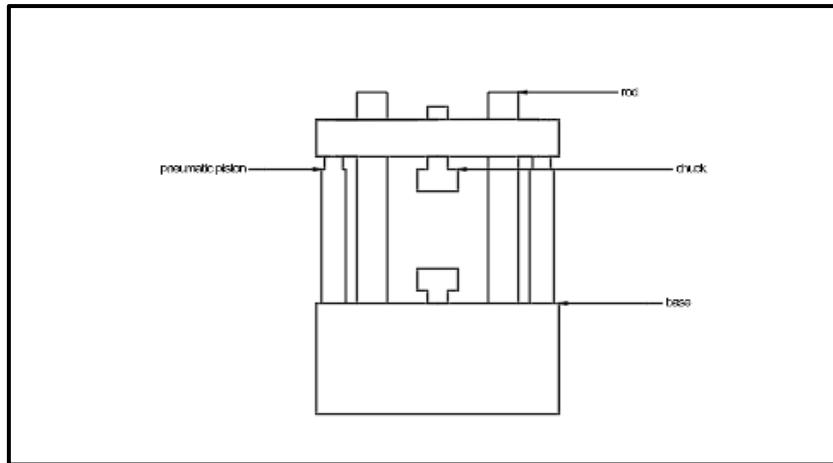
Vertical Multi Stress Testing machine [AUTOCAD]
